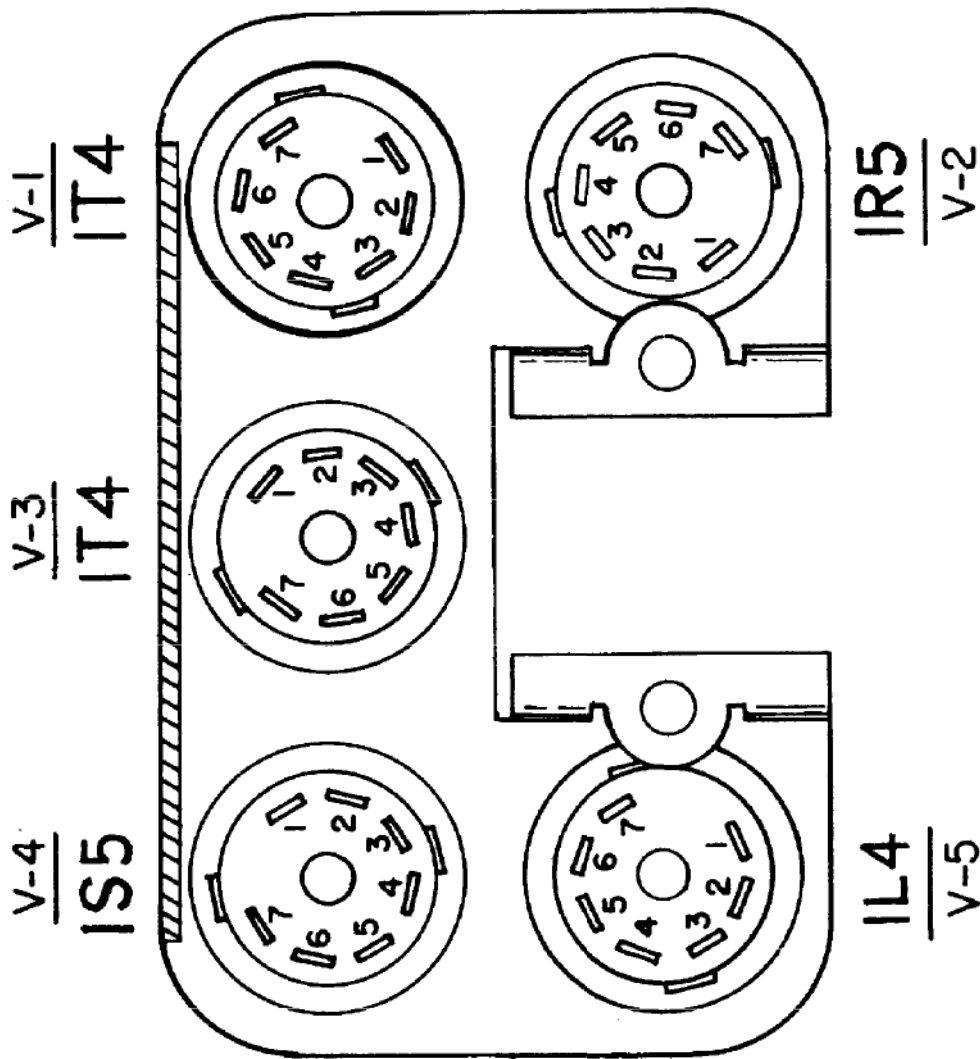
Vacuum Tube Socket, terminal location diagram (bottom view)
